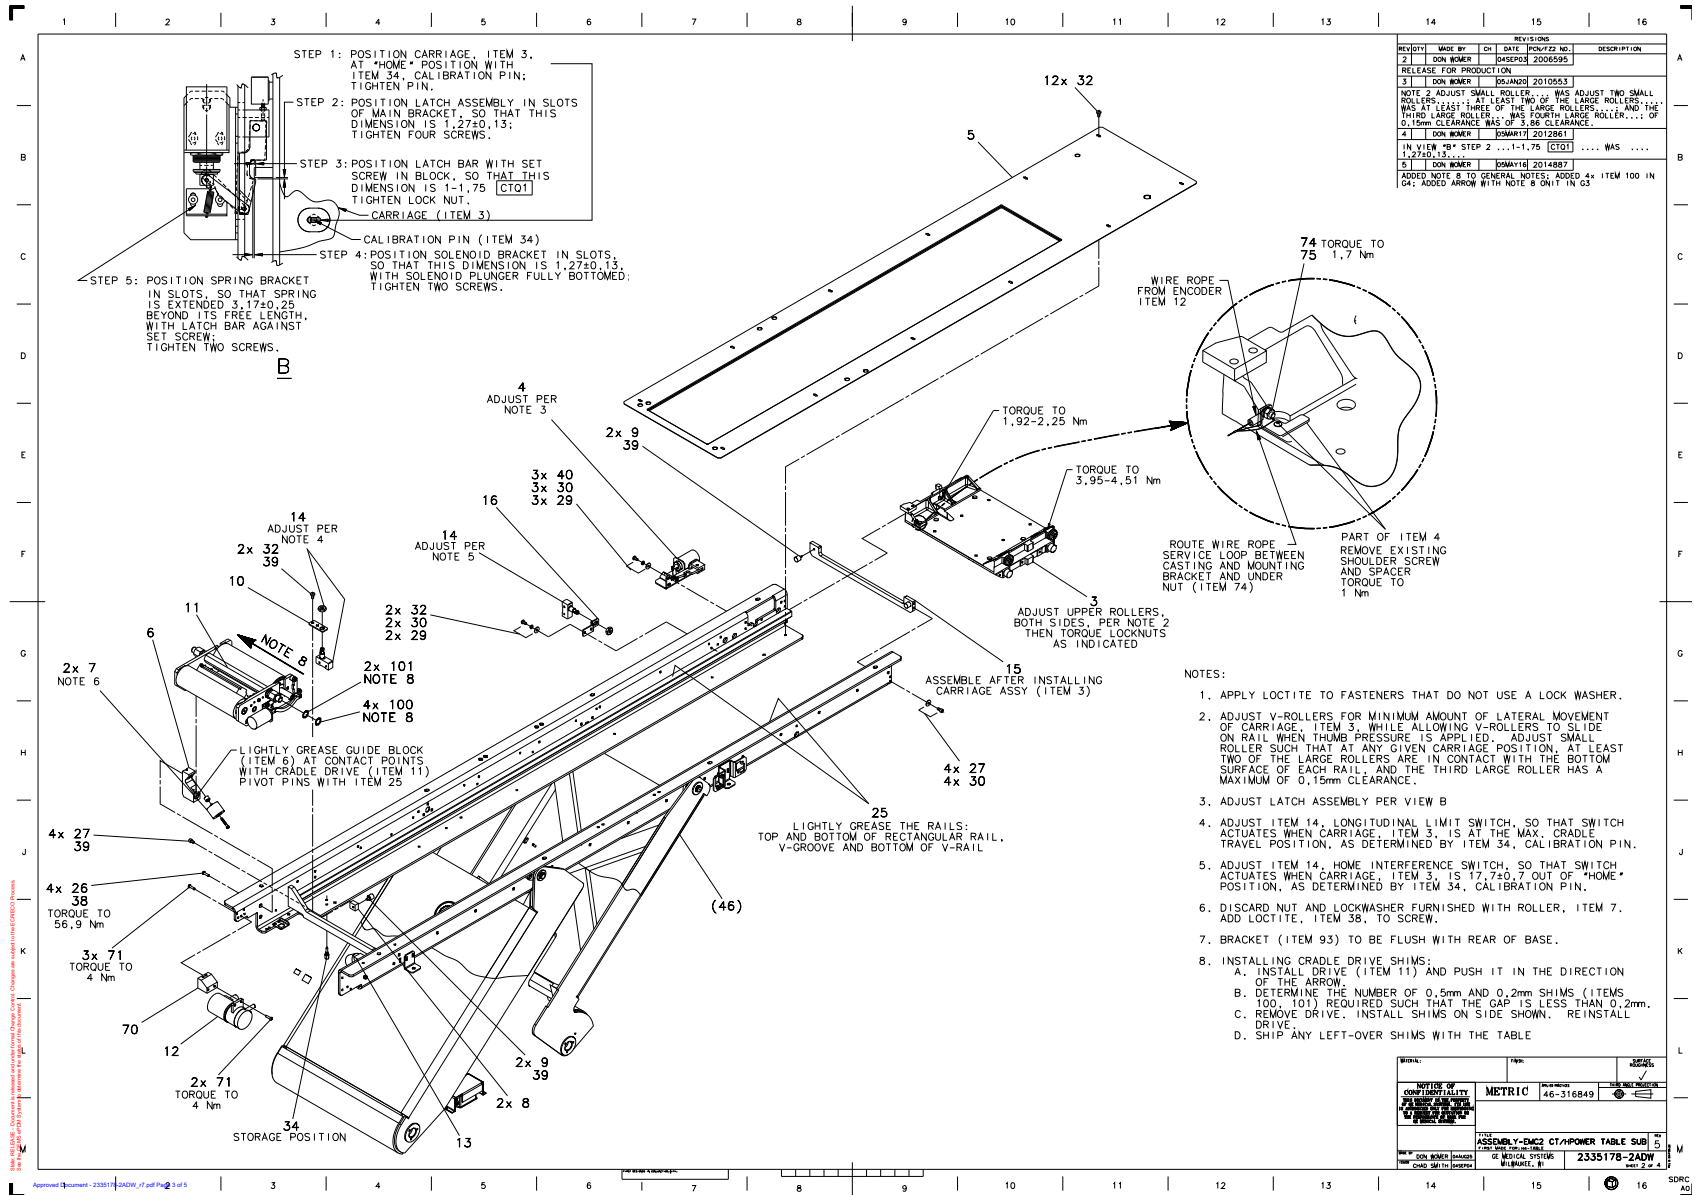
Table Subassembly (2335178-2 sheet 2, rev 5)
